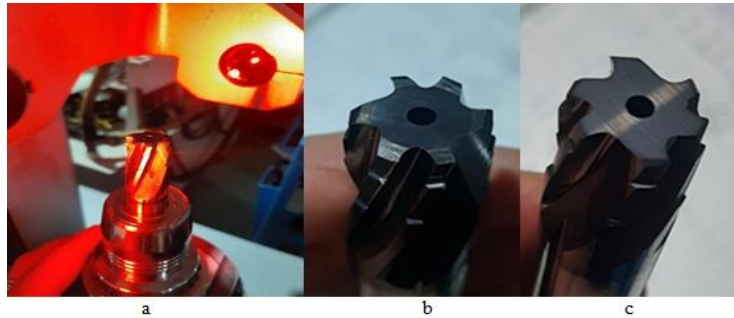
Photographs of reaming special tool: a) on Zoller equipment; b) worn tool; c) new tool.
